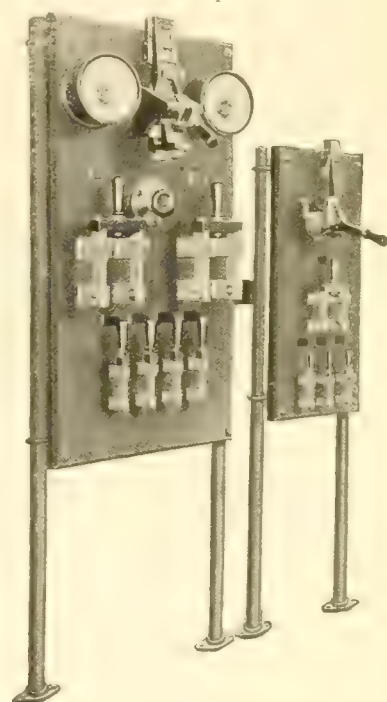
COMBINATION GENERATOR CONTROL AND WELDING PANEL (LEFT), AND WELDING CIRCUIT OUTLET PANEL (RIGHT)
